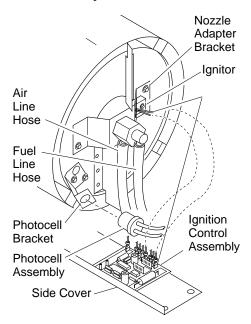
Disconnecting Ignitor Wires from Ignition Control Assembly
